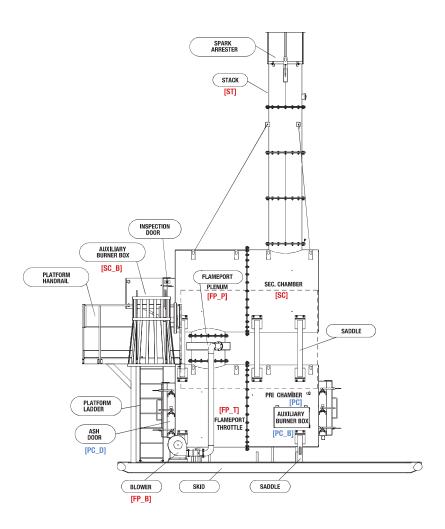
COMPONENTS IN THE PRIMARY AND SECONDARY CHAMBER SECTIONS (1)
